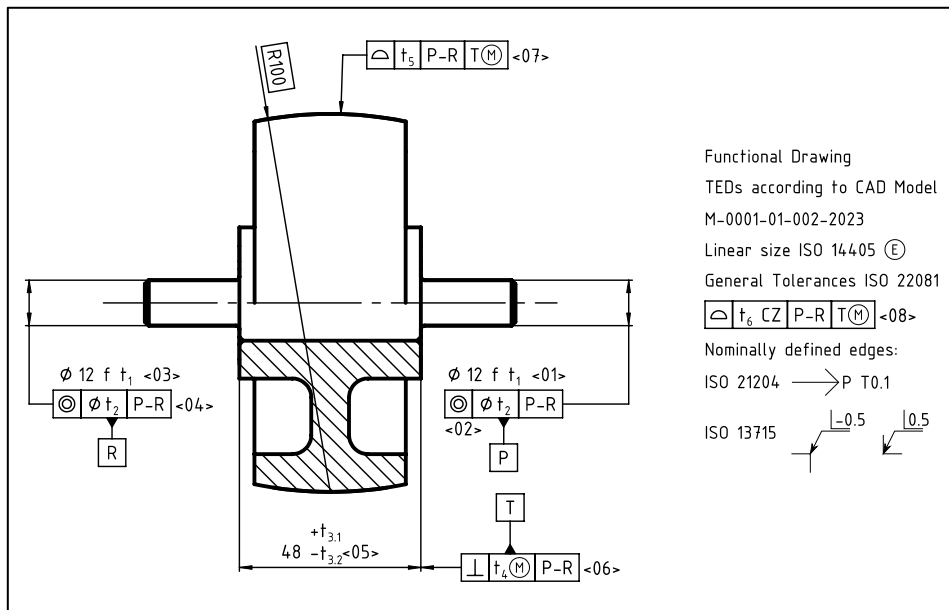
Extract from the “wheel_asm” 2D drawing.
